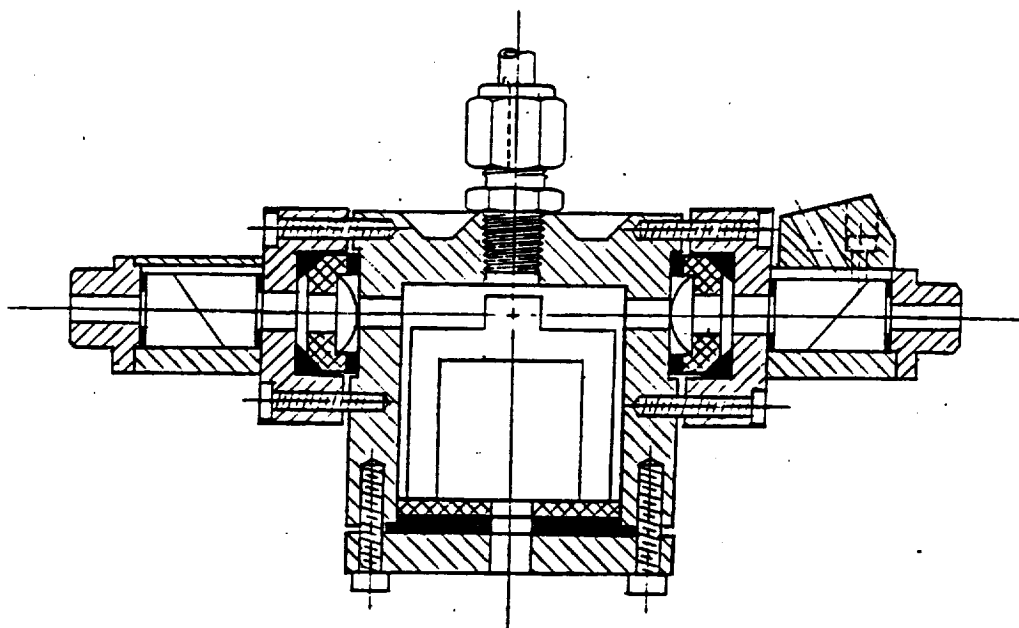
(Schematic) Final Transducer Design. Final Housing Geometry including Seals of Optical Ports for Testing at 1500° C Gas-Pressure Temperature.
